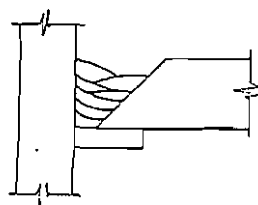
A completely detailed welding procedure helps guarantee uniform weld quality. It provides a road map for the weldor and a check list with which inspection can check weldor performance. In some cases more details will be required than are shown in this example.
